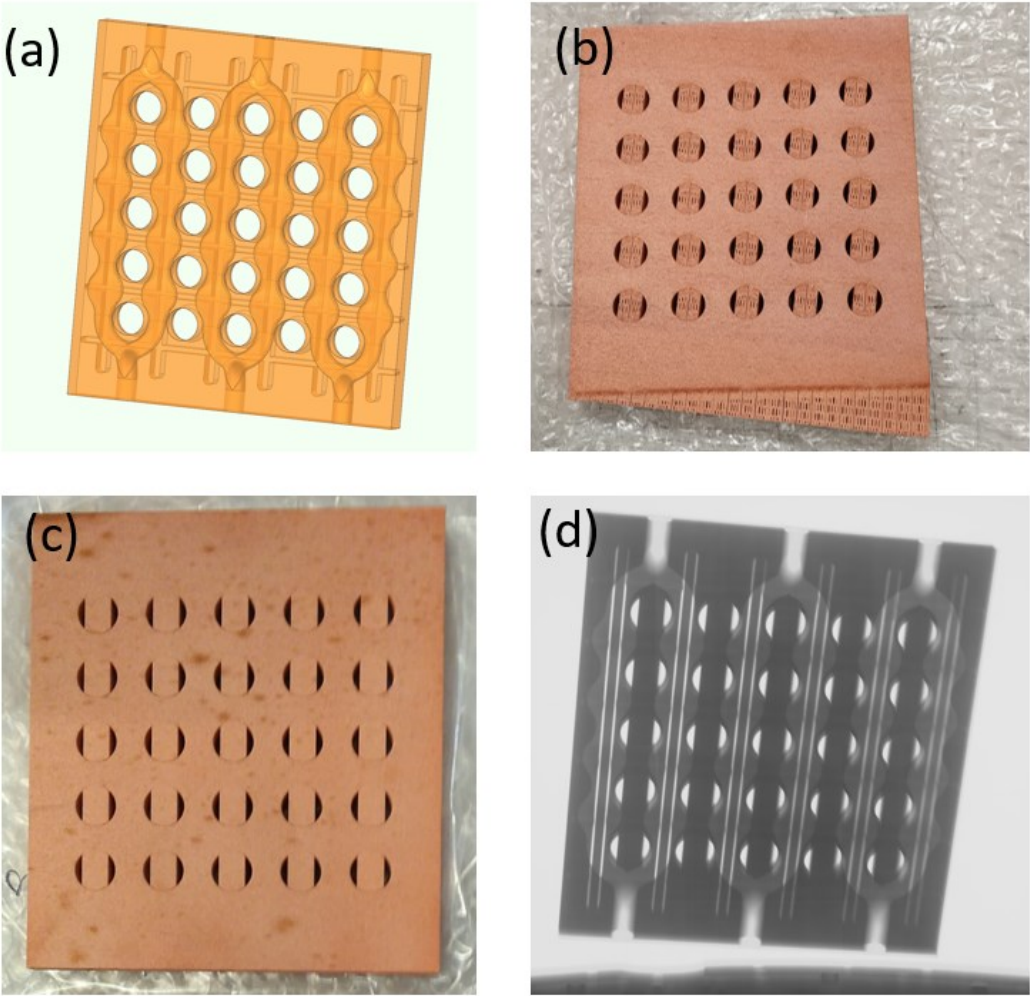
(a) CAD design of the “Leak Test” prototype. (b) Grid produced using EOS M290 1 kW. (c) Grid produced using TruPrint 5000. (d) CT scan of the “Leak Test” grid manufactured using TruPrint 5000.
